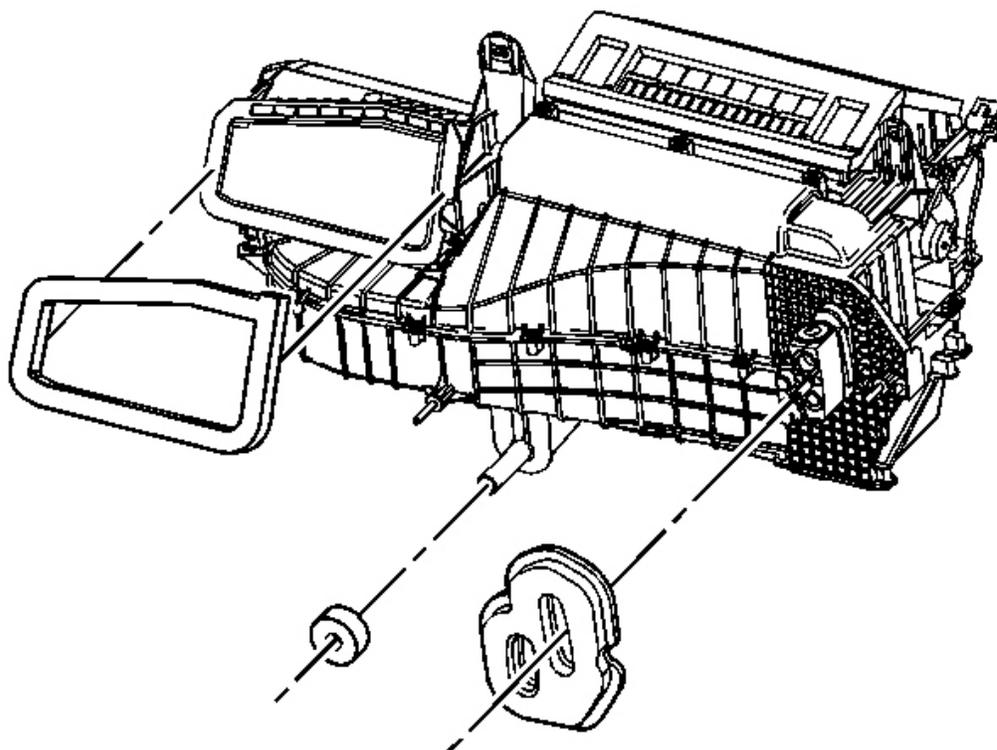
Identifying Air Inlet, Drain & Plumbing Seals in HVAC Module
